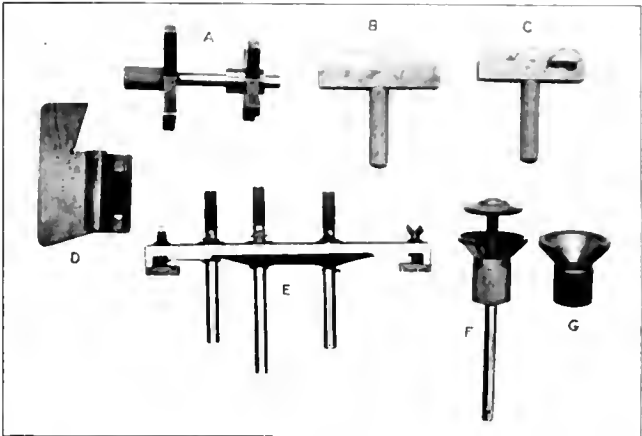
Some of the Gages used in the Inspecting Department for Testing the Accuracy of Keyseats, Valves, Bevel Gears, etc.
